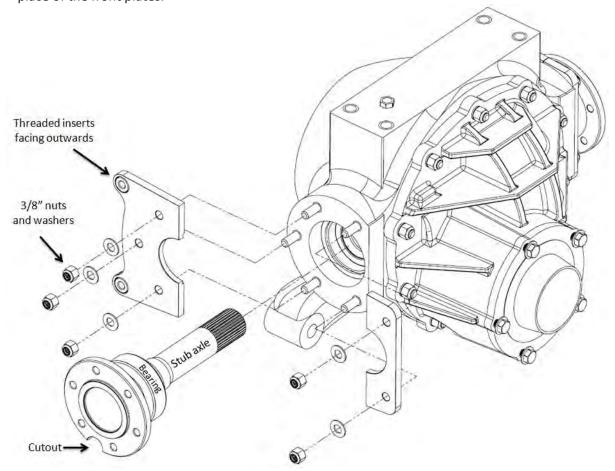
Passenger side axle (longer axle) being installed with the caliper plates (some parts removed for clarity).
